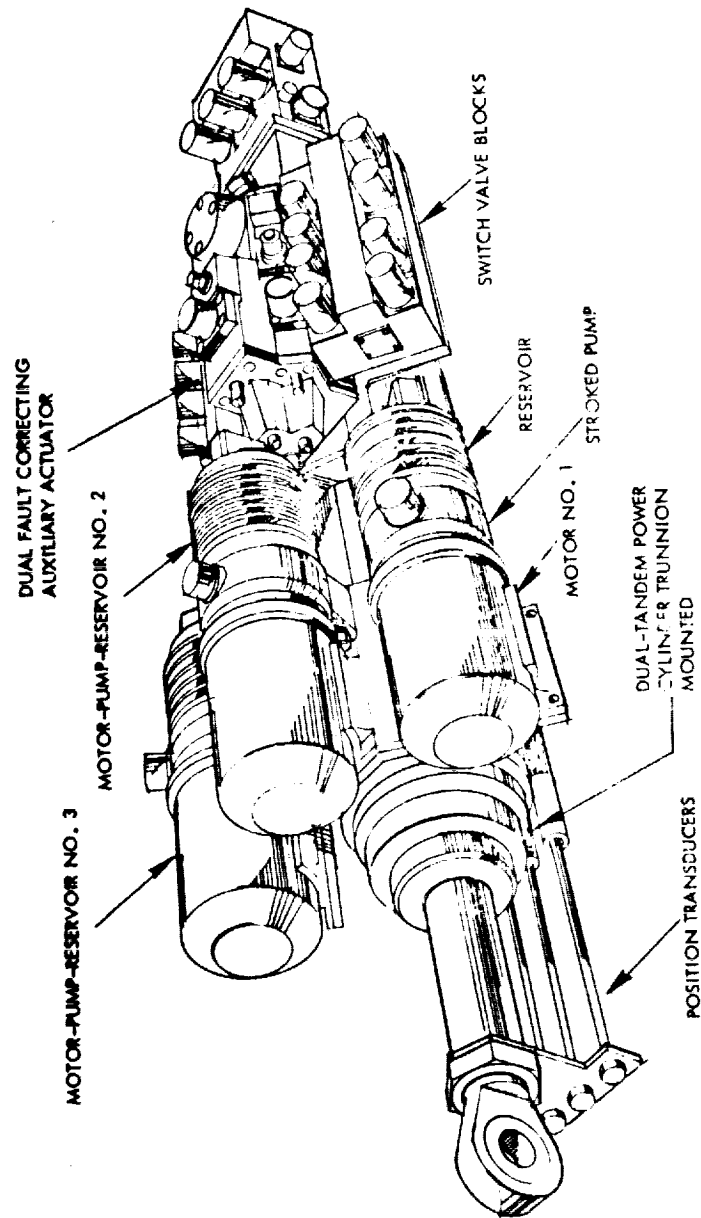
TRIPLEX ACTUATOR PACKAGE
